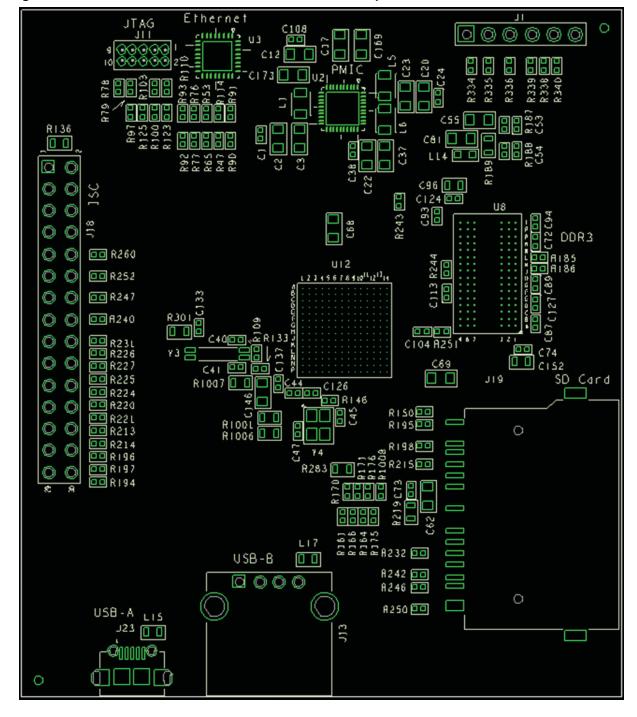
SAMA5D2-BGA196 4L Board Placement Example
